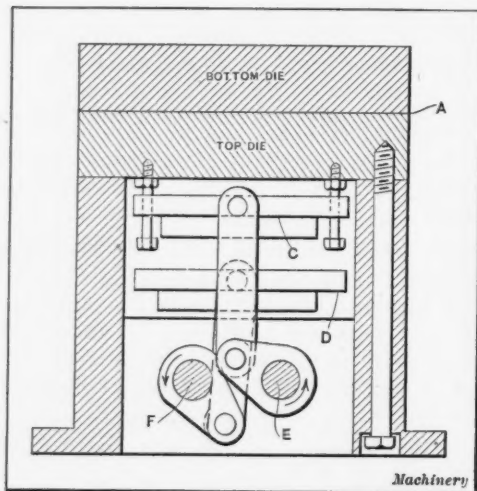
Diagrammatical View showing Arrangement of Mold for Die Casting
